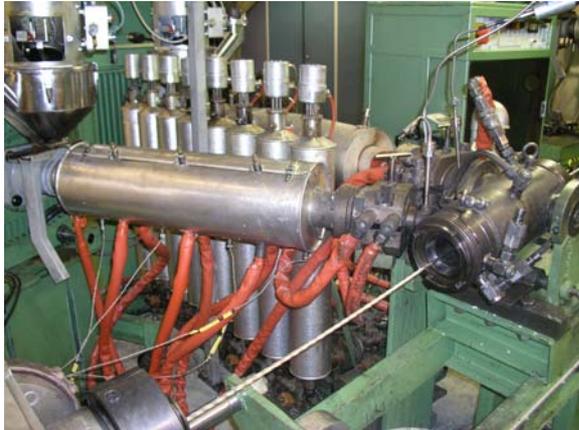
Cable line dismantled showing stranded conductor for 20 kV and two of the three extruders used for three layer extrusion.
